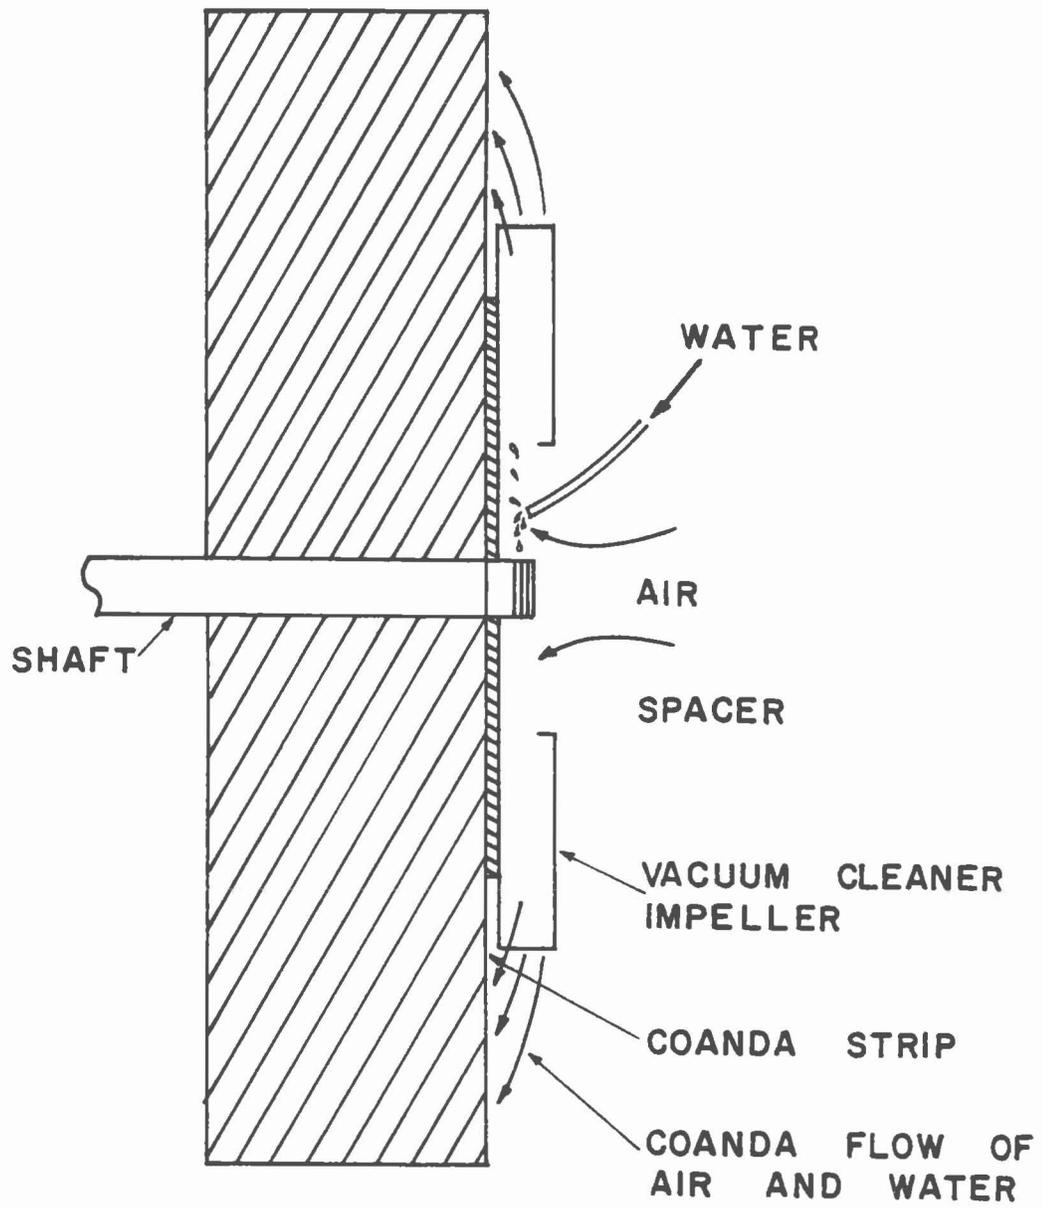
Schematic drawing of dust control system for large grinding wheel.
